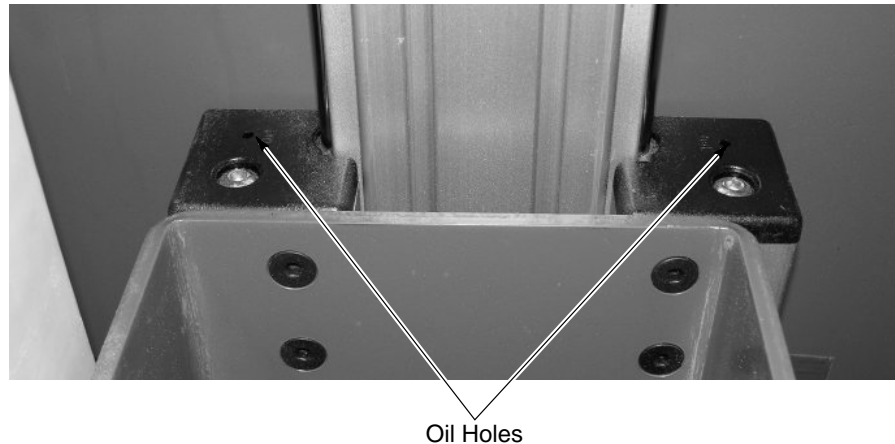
Rail Bearing Lubrication (Top Bearings Shown-4 Bearings per Carriage)
